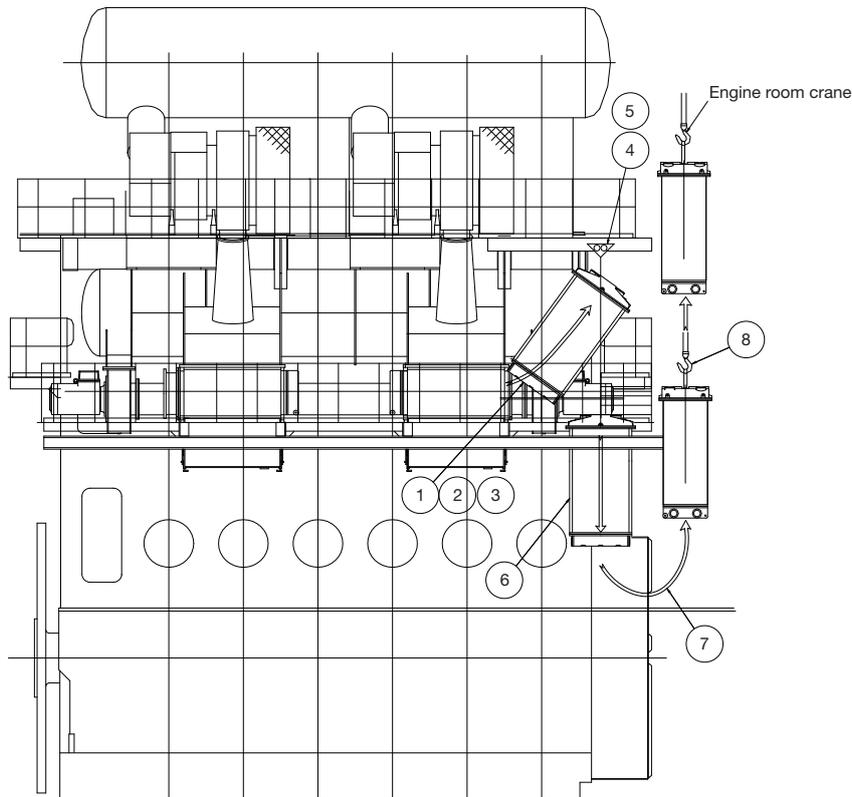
Crane beam for overhaul of air cooler, turbochargers located on exhaust side of the engine
